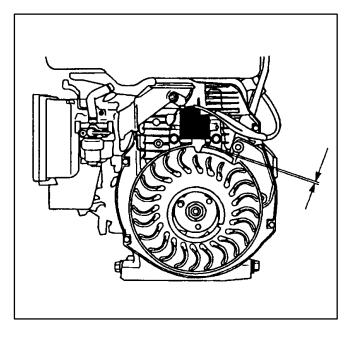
MEASURING CLEARANCE BETWEEN TRANSISTOR MAGNET UNIT AND FLYWHEEL MAGNET (GH170, GH280 ENGINES)
